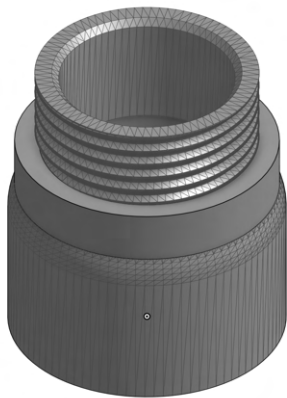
CAD model of the adapter that is used to keep the O-ring in place.
